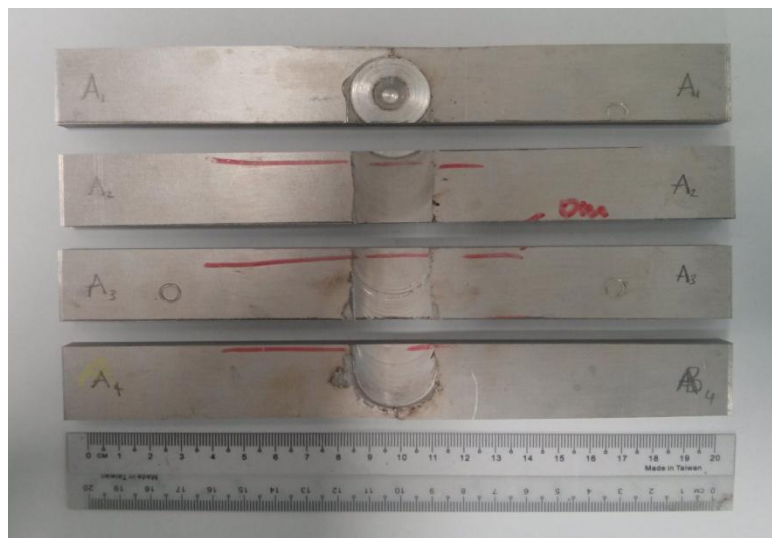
13: Aluminium welded plate is sectioned by using EDM machine
